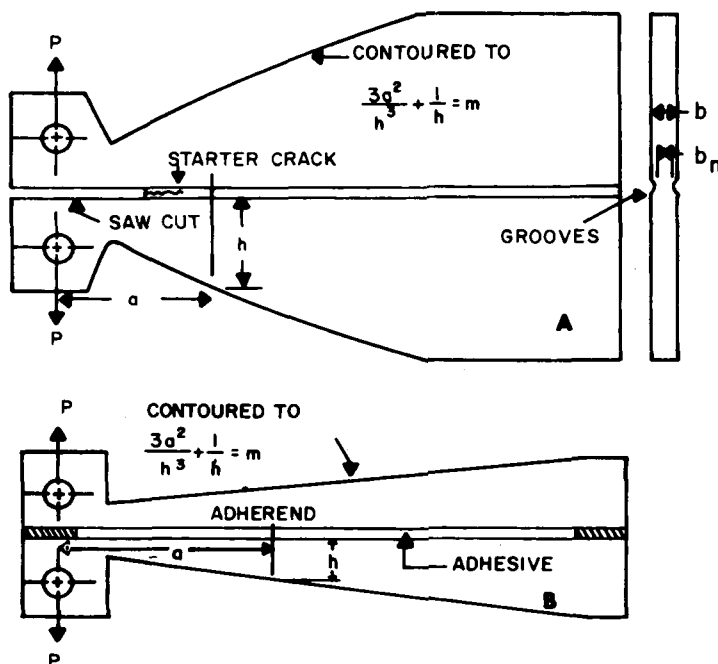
Tapered-DCB bulk (A) and adhesive (B) test specimens for opening mode fracture.
